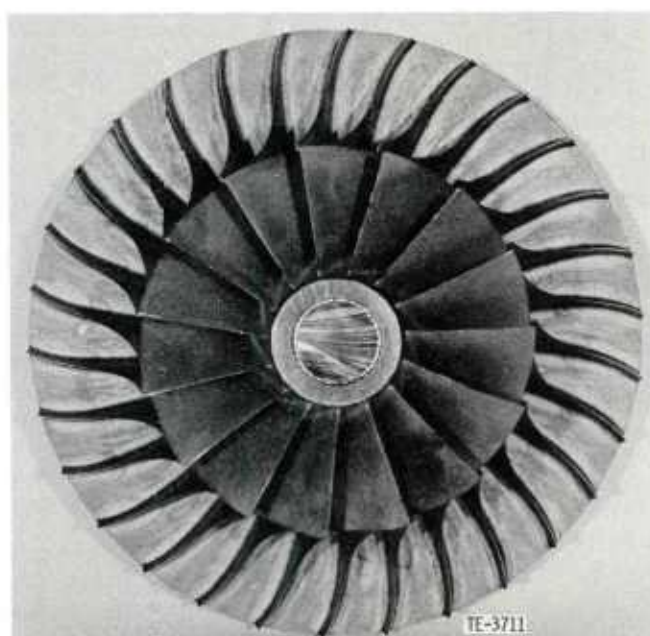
Hub/shell assembly with laser-welded seam.
